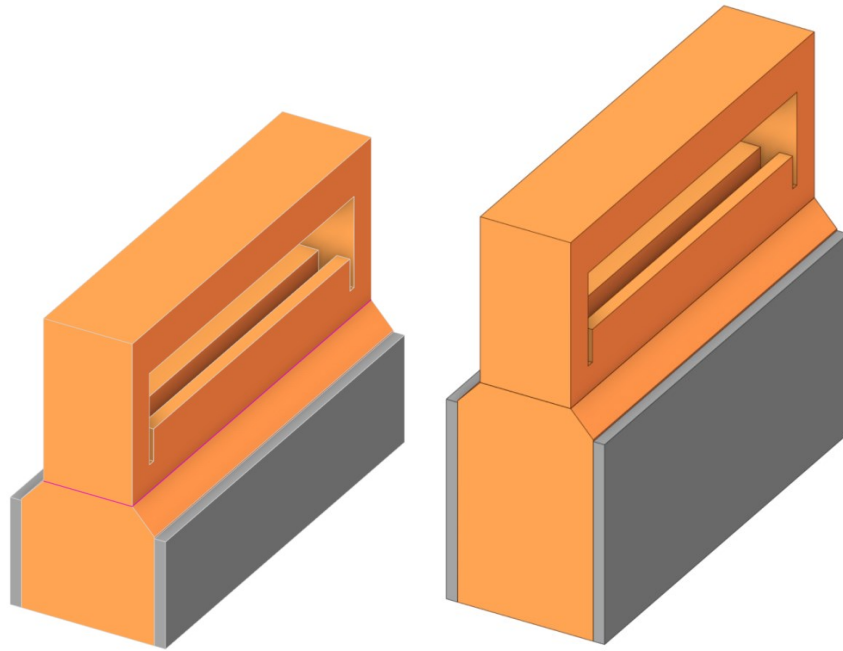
CAD designs of Geometry #2 and Geometry #3 without the coil
